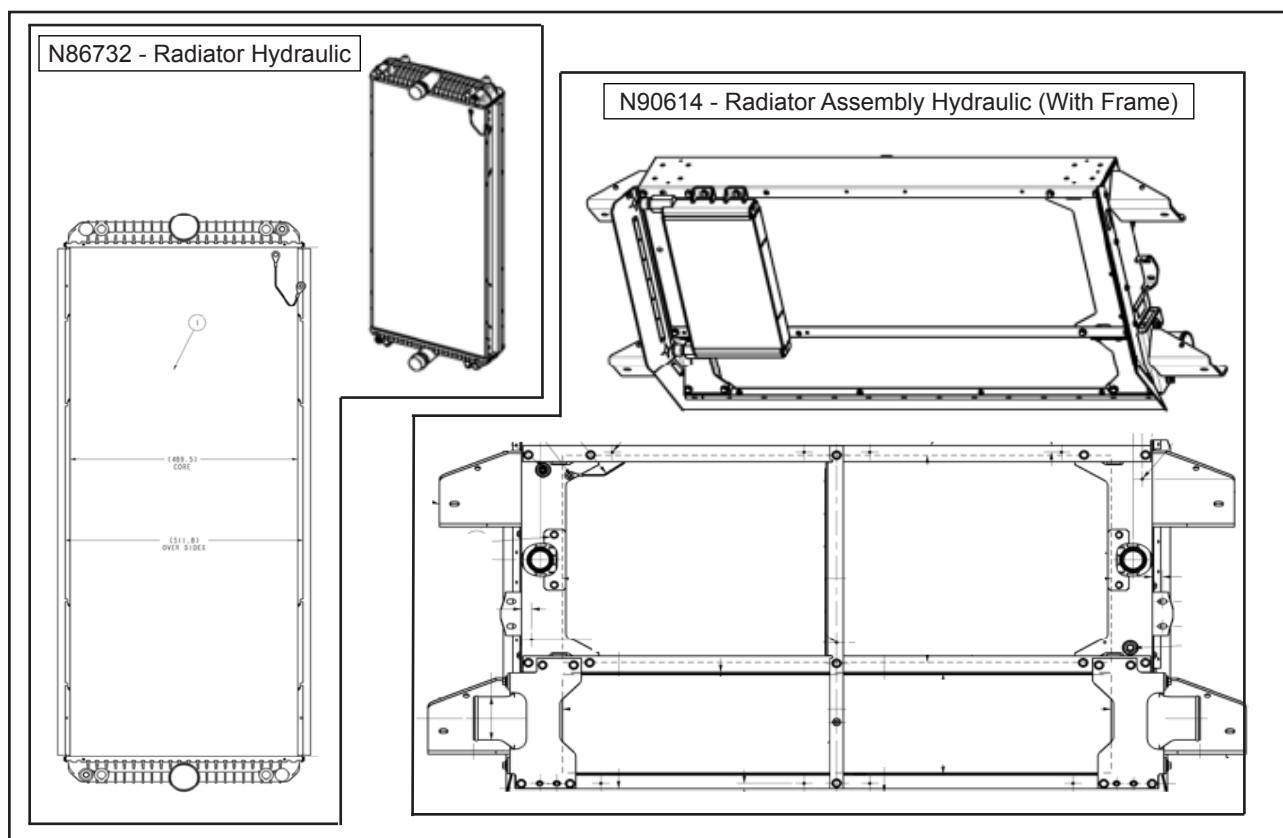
Typical View of New Radiator and Complete Radiator assembly with Frame
